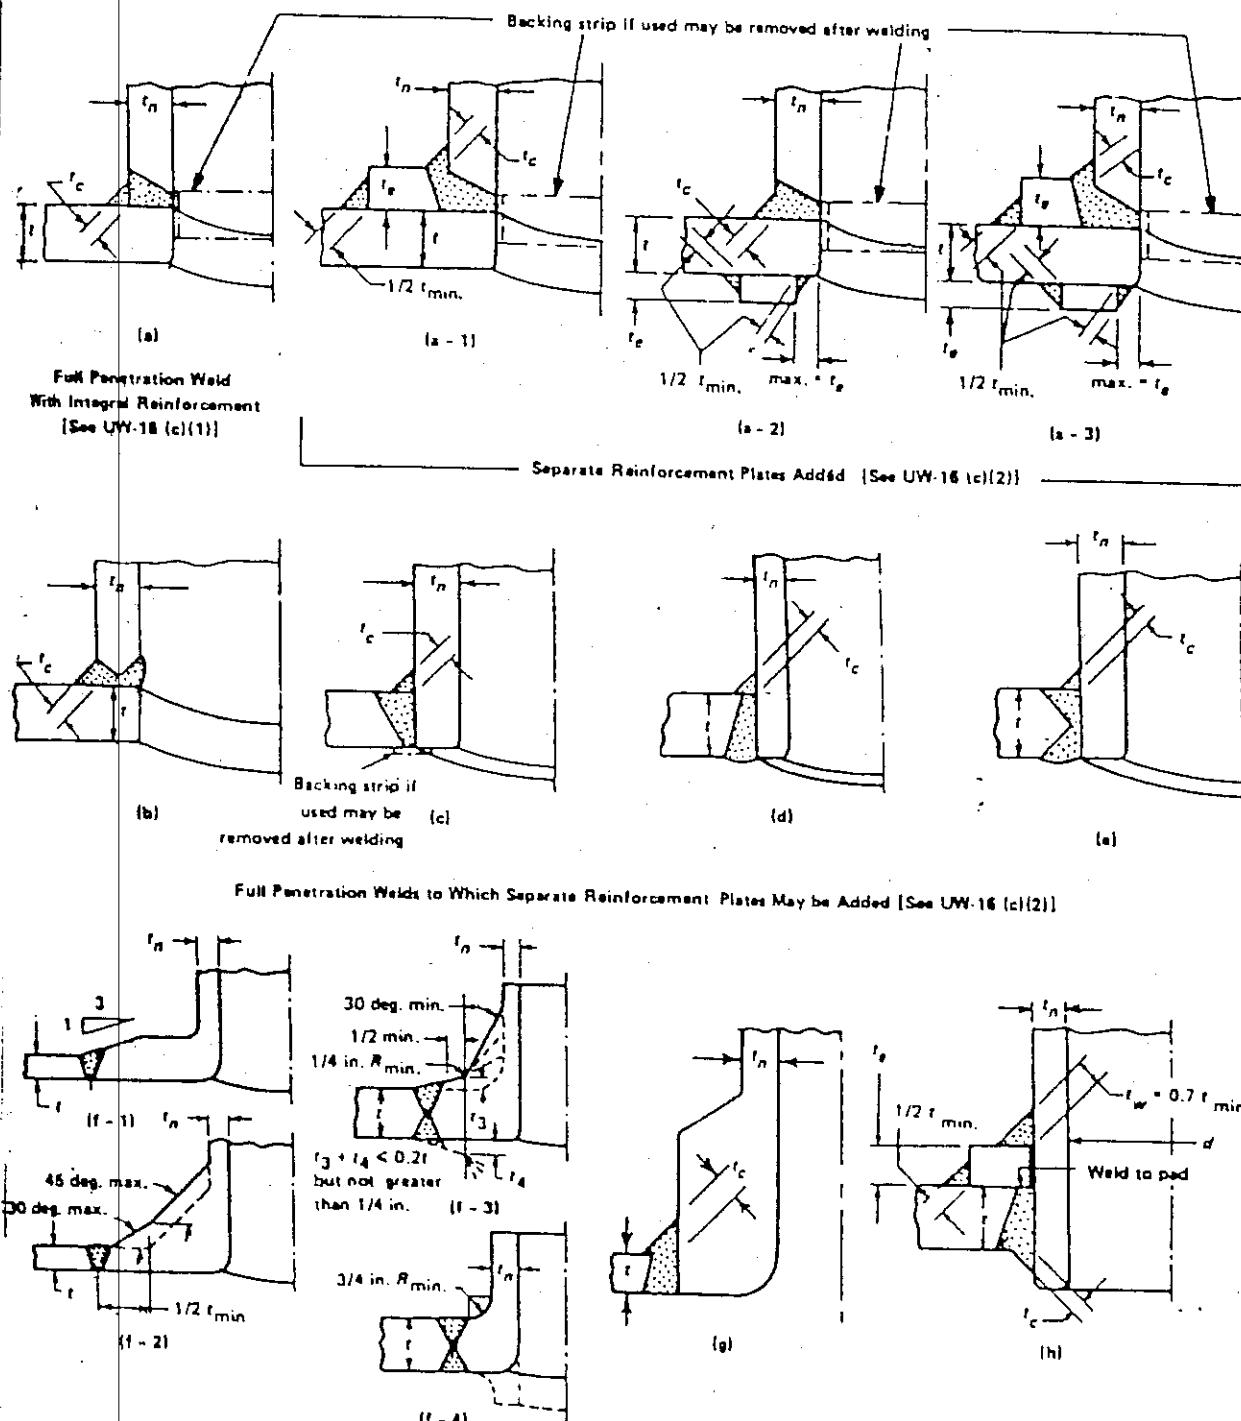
SOME ACCEPTABLE TYPES OF WELDED NOZZLES AND OTHER CONNECTIONS TO SHELLS, DRUMS, AND HEADERS
